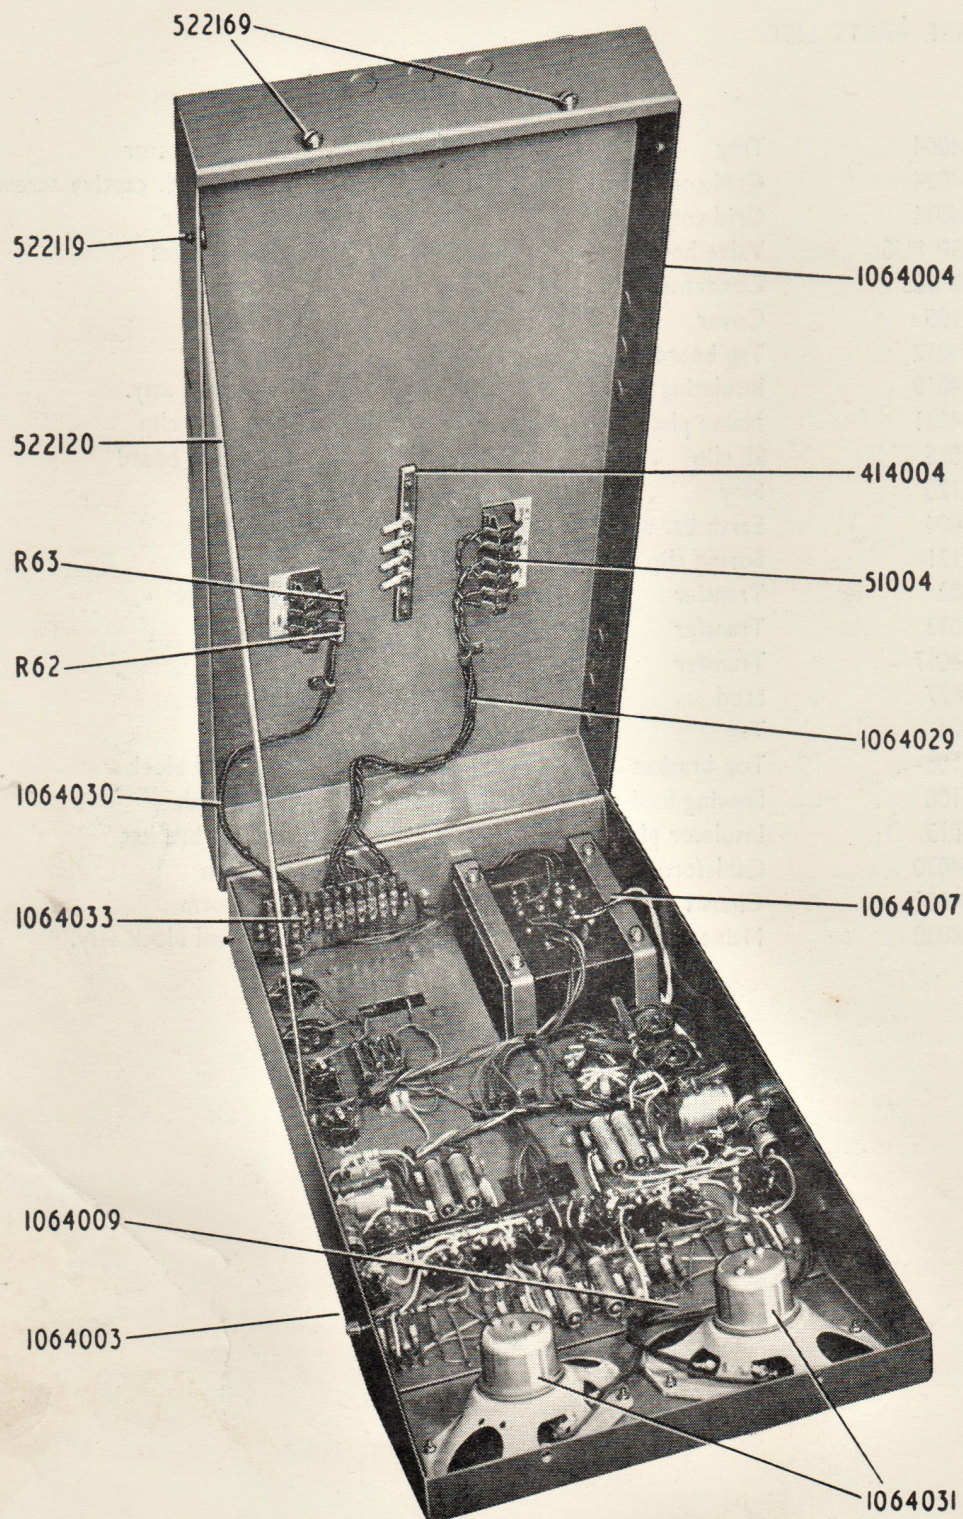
SPARE PARTS OF I064 CHASSIS AND BACK TRAY, INTERNAL
